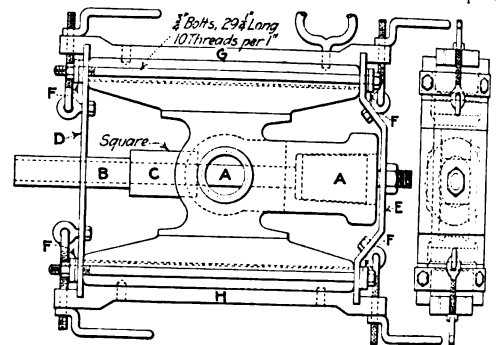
ANOTHER TYPE OF BABBITTING FIXTURE
